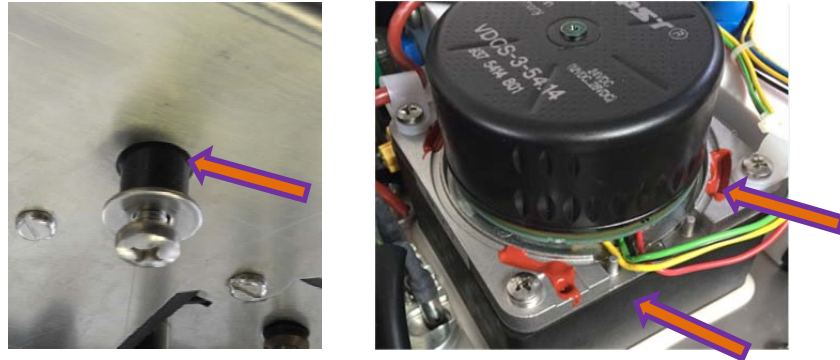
Plug applied to the tank lid, inside tank (*left*) and holes in water pump housing filled with silicone sealant and heat shrink sealing material (*right*)
